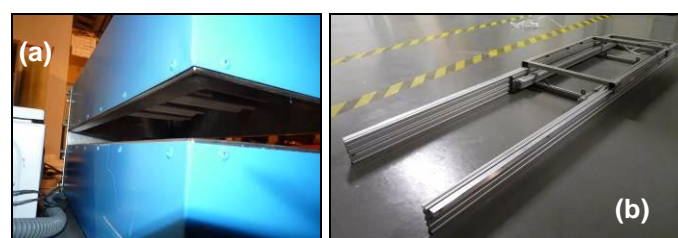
(a) Radiant heater used to heat blank. The upper heating lamps are visible, similar lamps are also positioned in the bottom of the oven. (b) Shuttle system frame and blank-holder frame.
